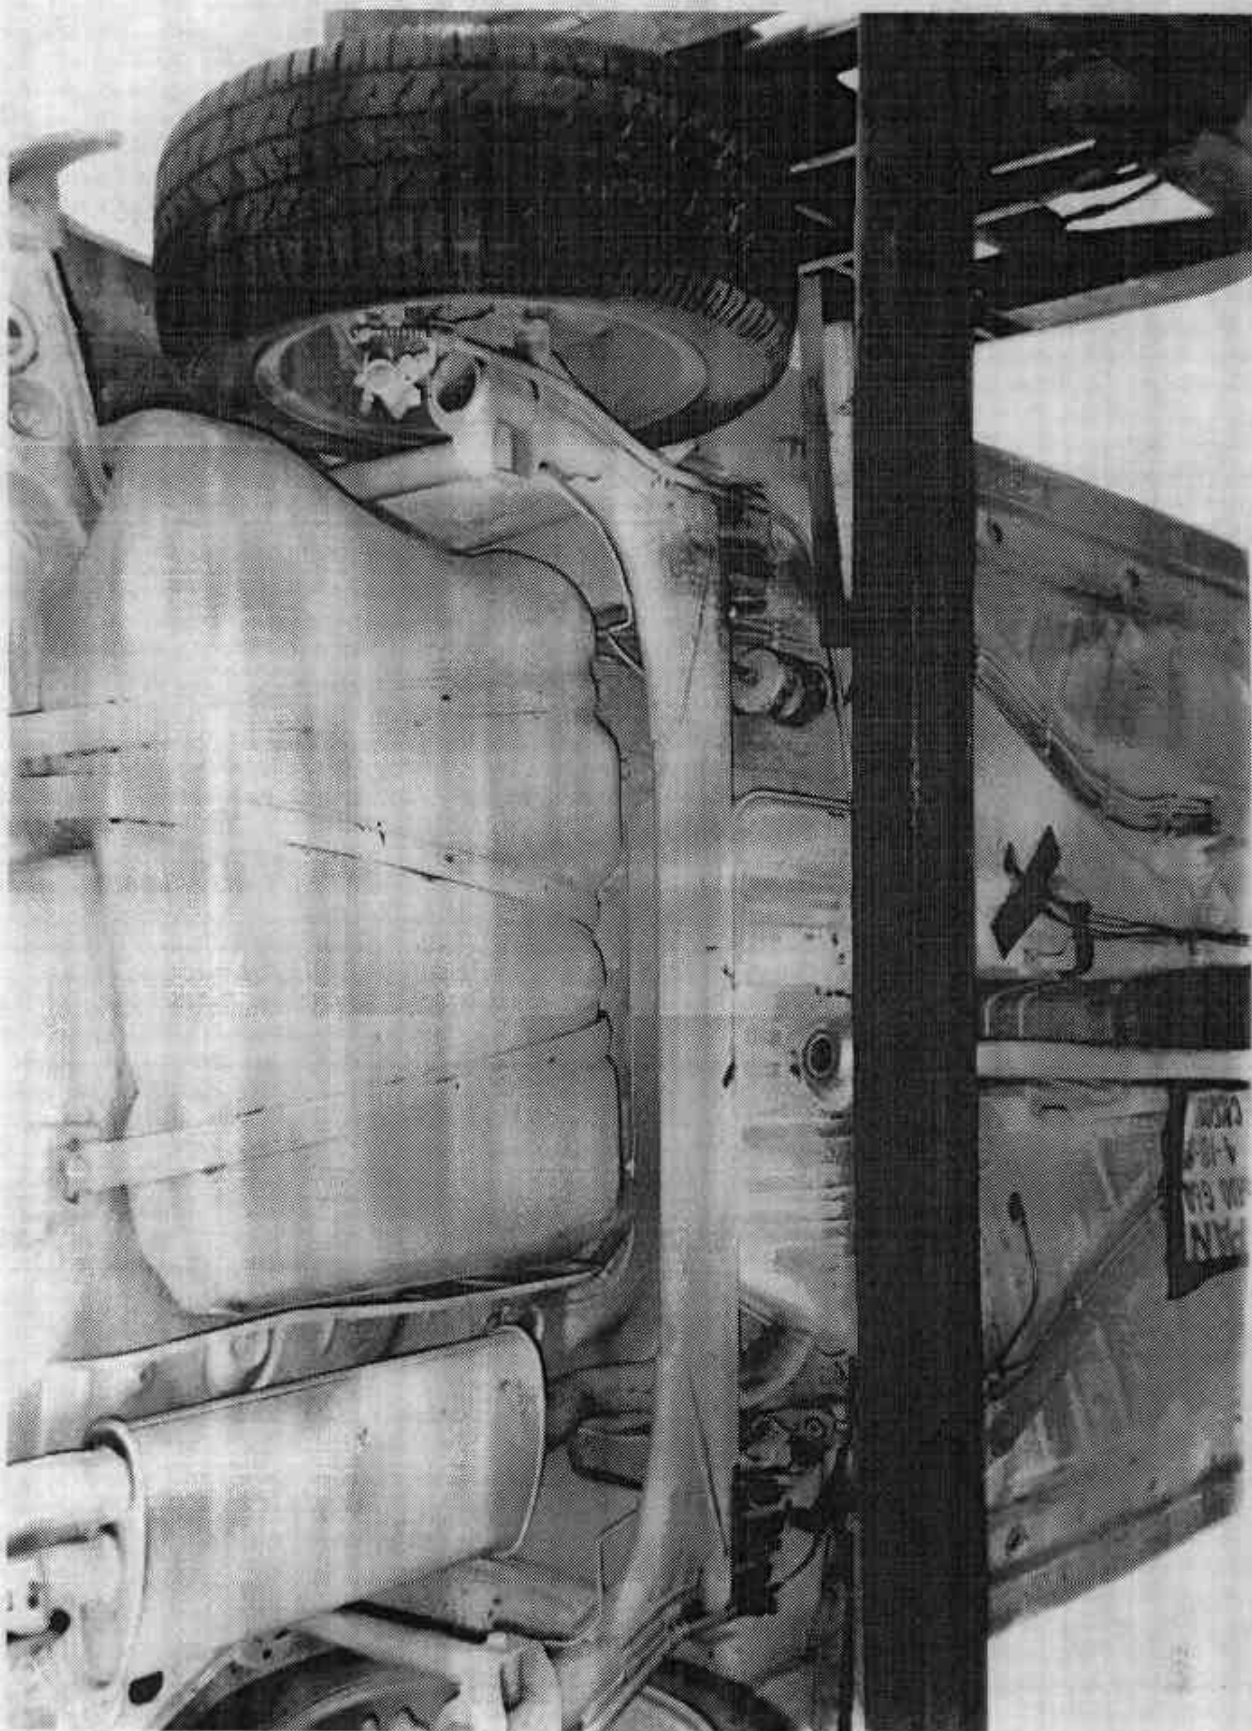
POST-TEST REAR UNDERBODY VIEW
